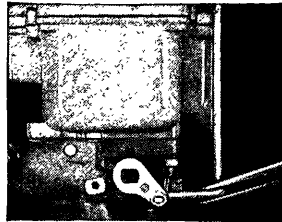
Install throttle shaft lever and throttle connector rod. Don't forget throttle shaft washer
